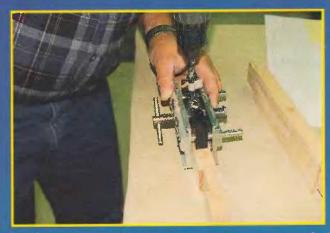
Boring the locating pin hole in the top half of each set of rails.
